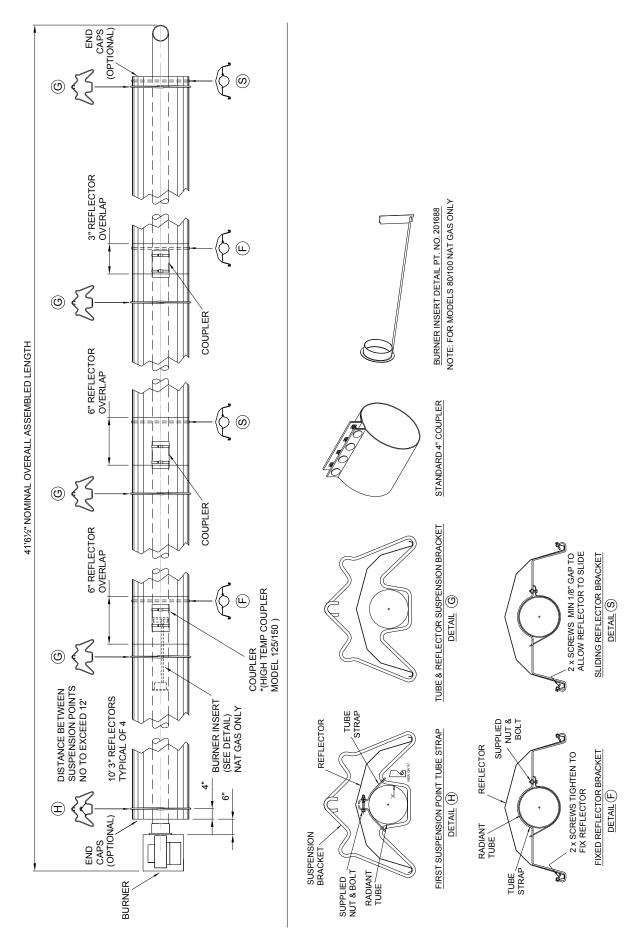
Heater Assembly: Model Linear 100-S50, 125-S50, 150-S50, 170-S50, and 200-S50
